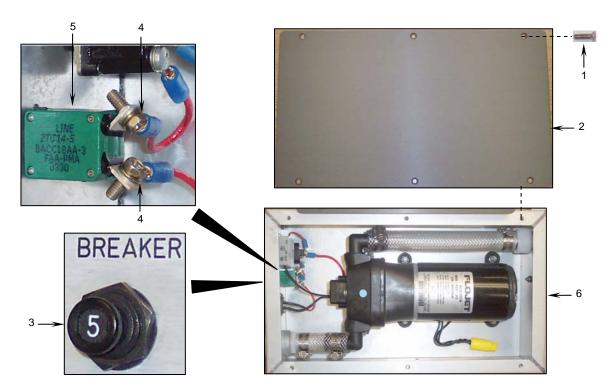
Testing the Fill Pump Assembly Circuit Breaker.
